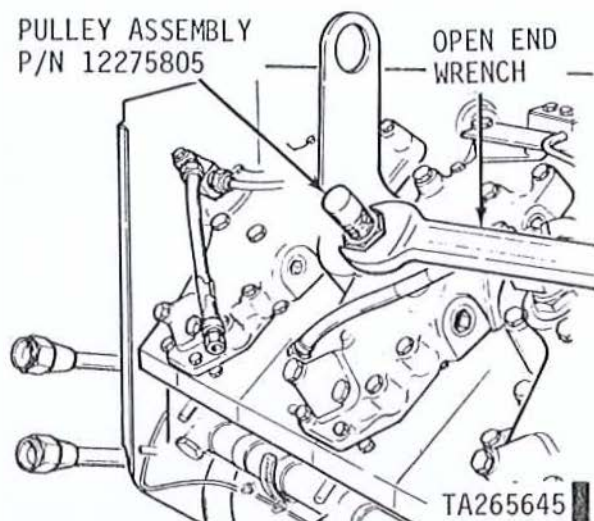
Removing fuel injector nozzle capnut with puller assembly.
